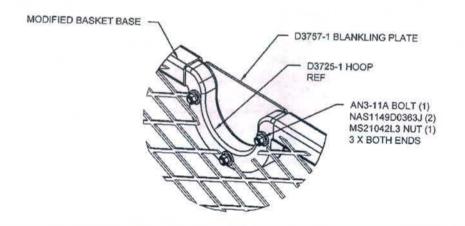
D3757-1 BLANKING PLATE INSTALLATION
